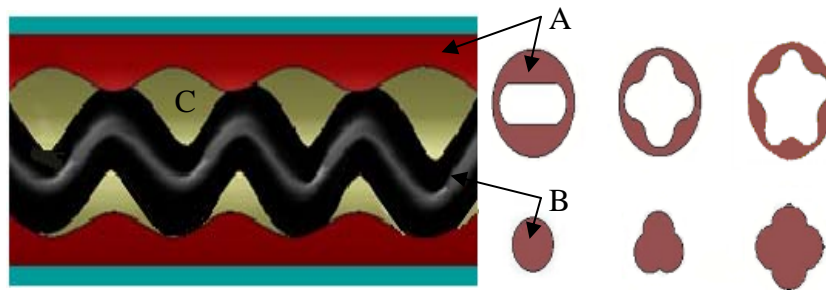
Schematic drawing of rotor and stator: A-profiles of stator; profiles of B-rotor; C-cavity.
